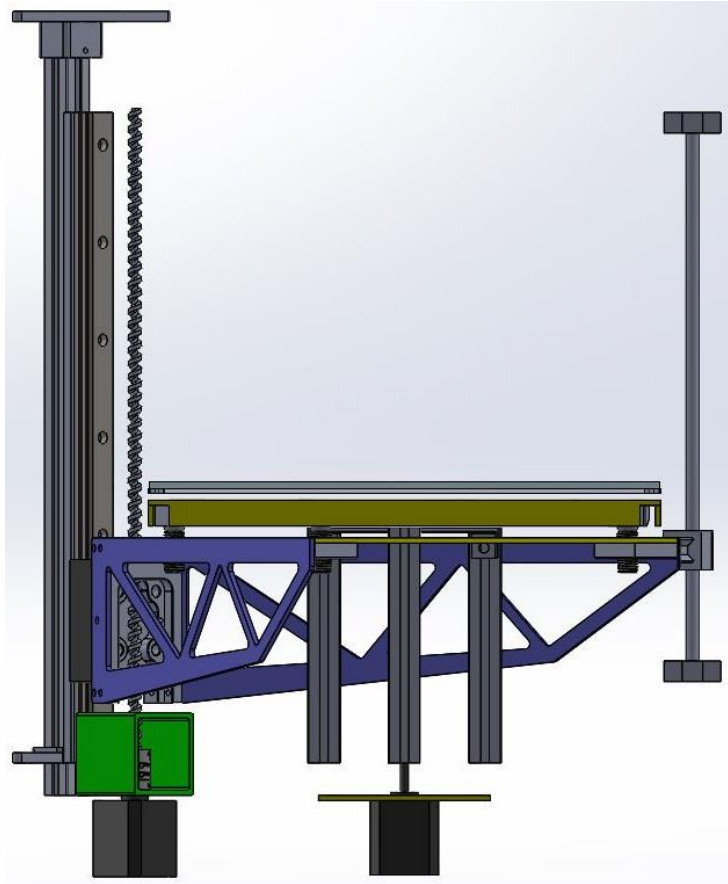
Elements of the Z axis including motion elements, build platform, and bed rotation mechanism.
